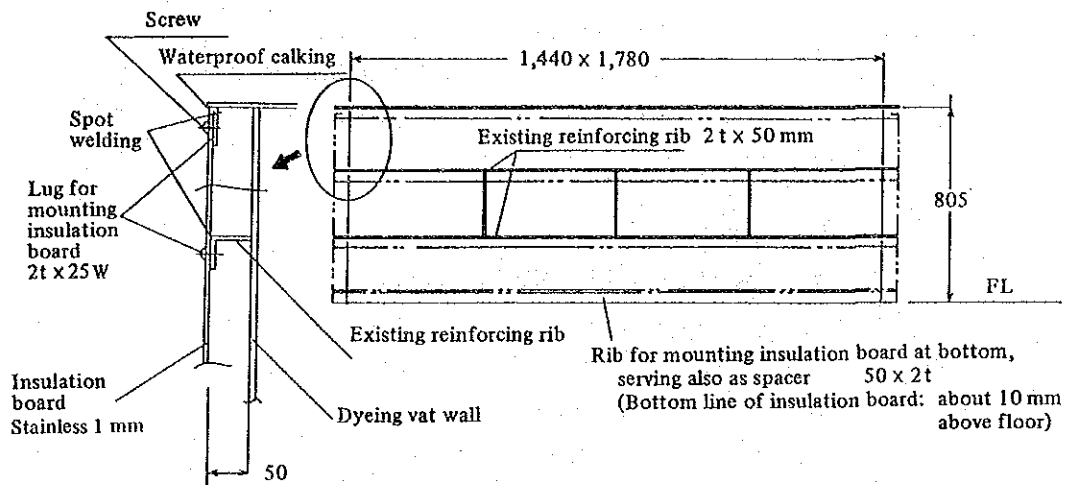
Dyeing Vat Heat Insulation Work
